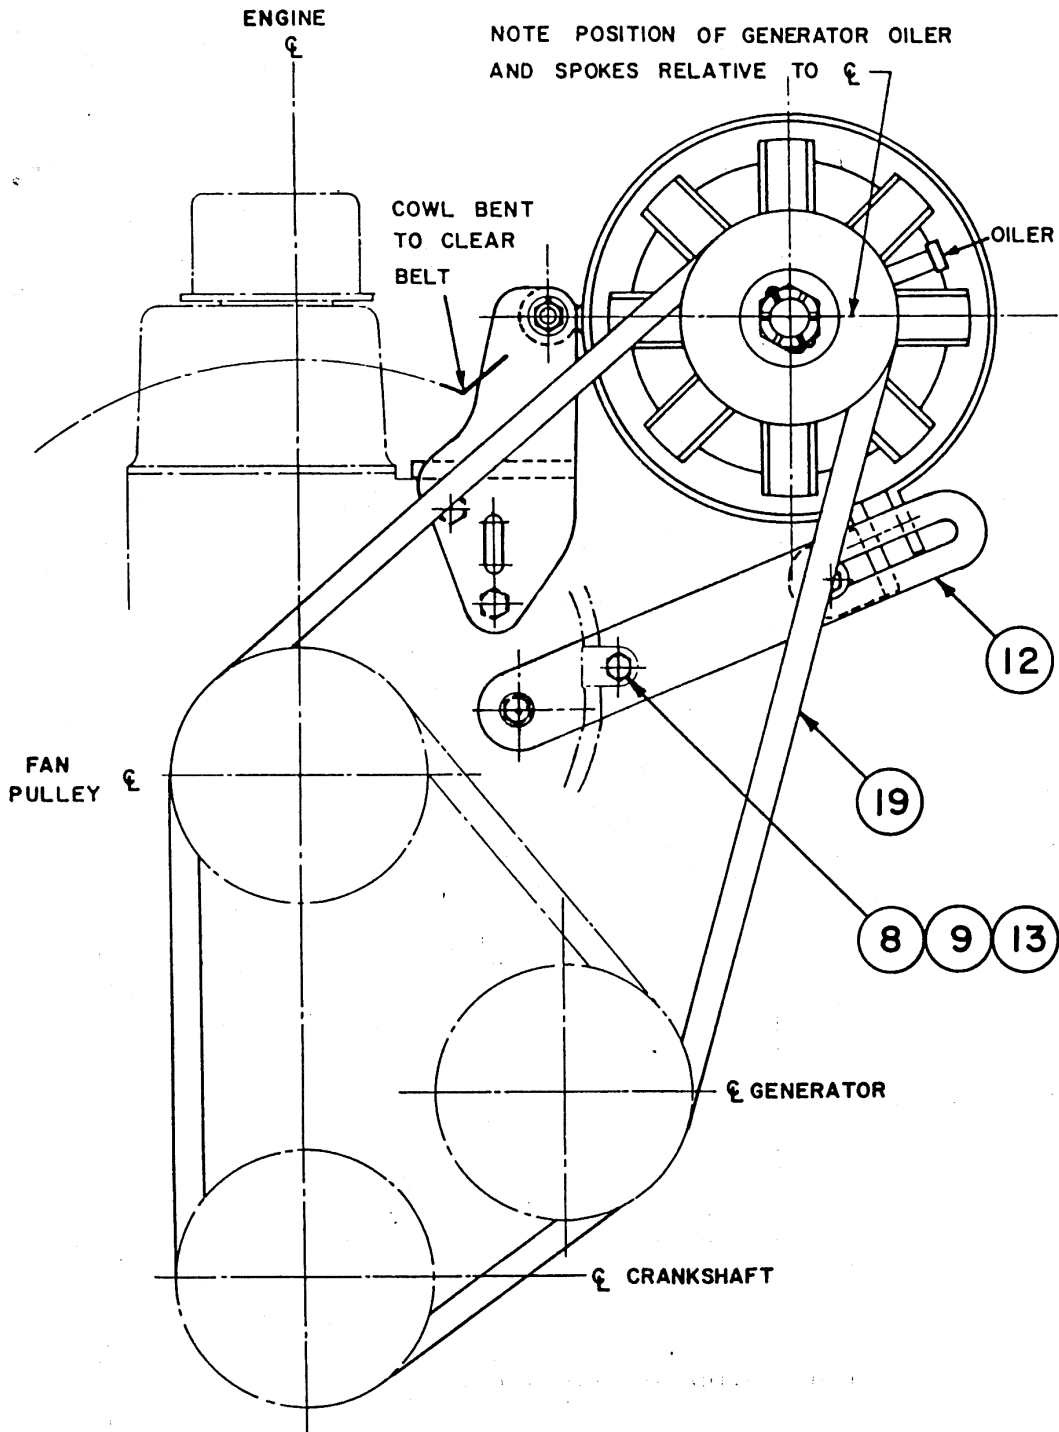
FITTING OF ALTERNATOR TO ENGINE - END ELEVATION
